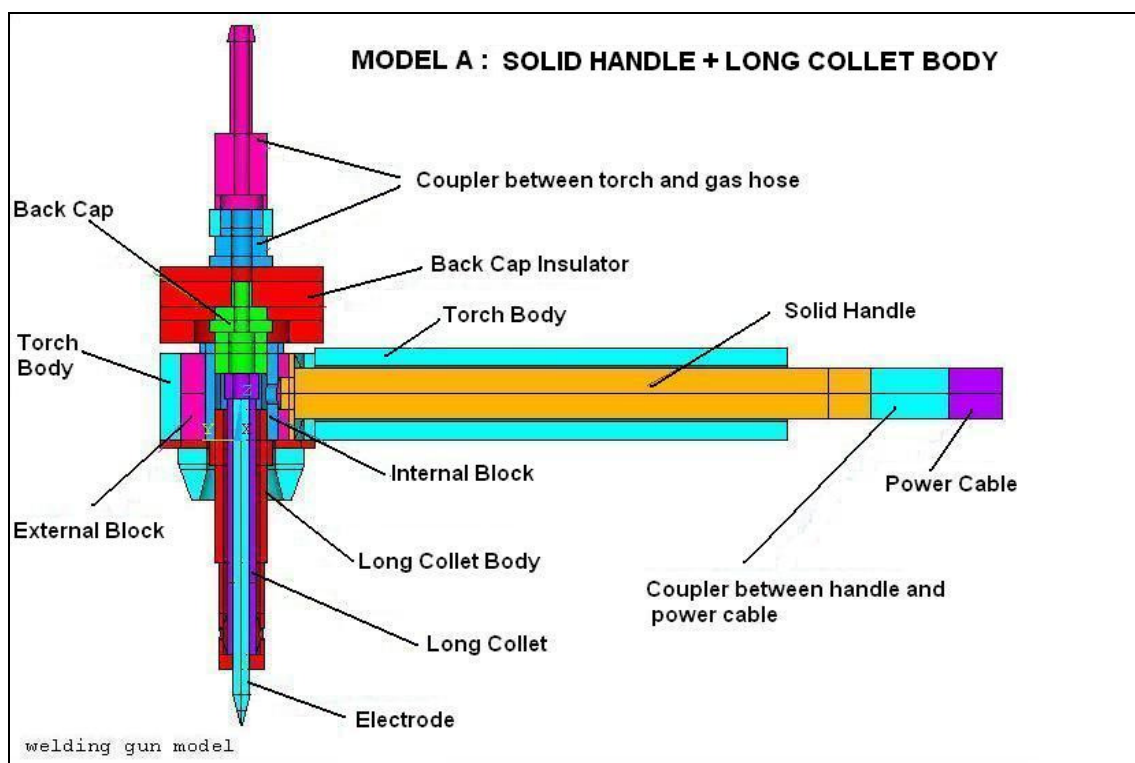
Cross-sectional view of welding torch model A.
